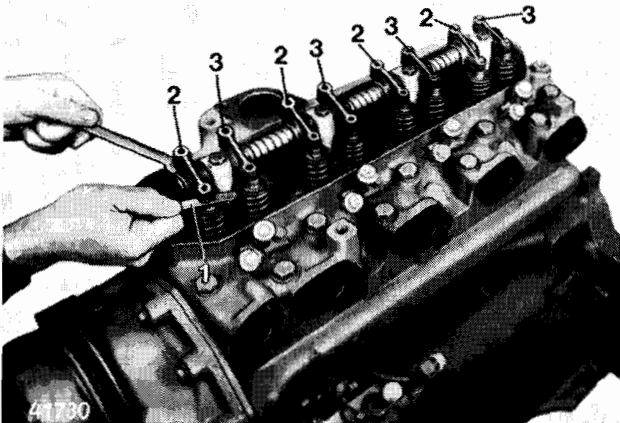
Adjusting Clearance of the Intake Valve of Cylinder No. 1
